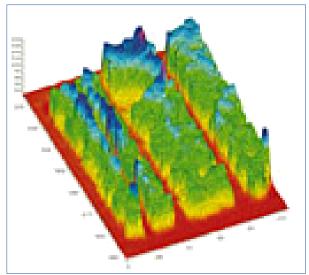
Example of a solder paste thickness profile via 3D SPI
